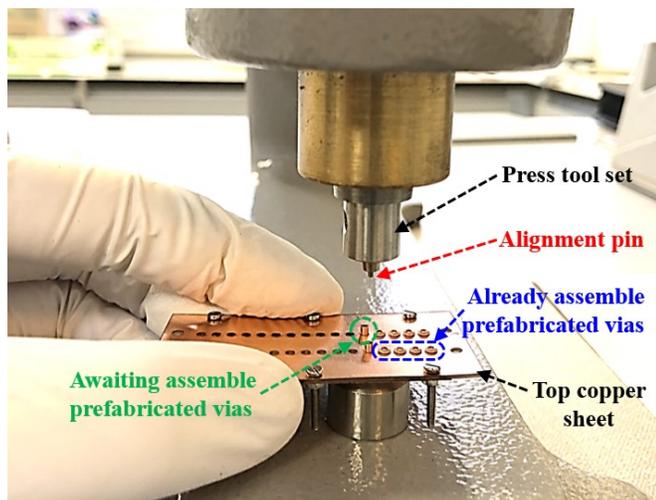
Assembly process of the proposed HSIW, by using the Mechanical Through Hole Plating method.
